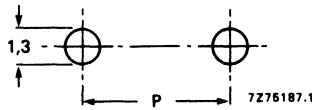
Trimmer pin holes, for P dimensions see selection chart.
